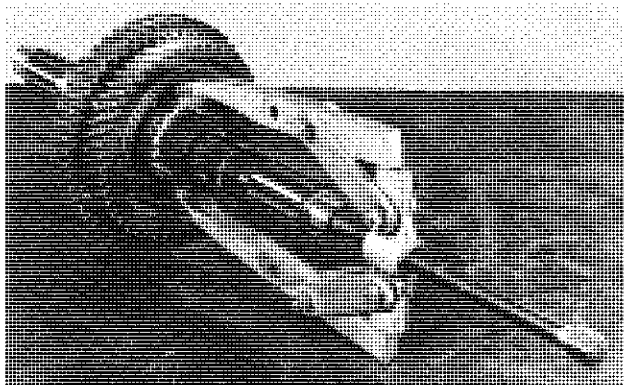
Removing 2nd-3rd Speed Clutch Gear
